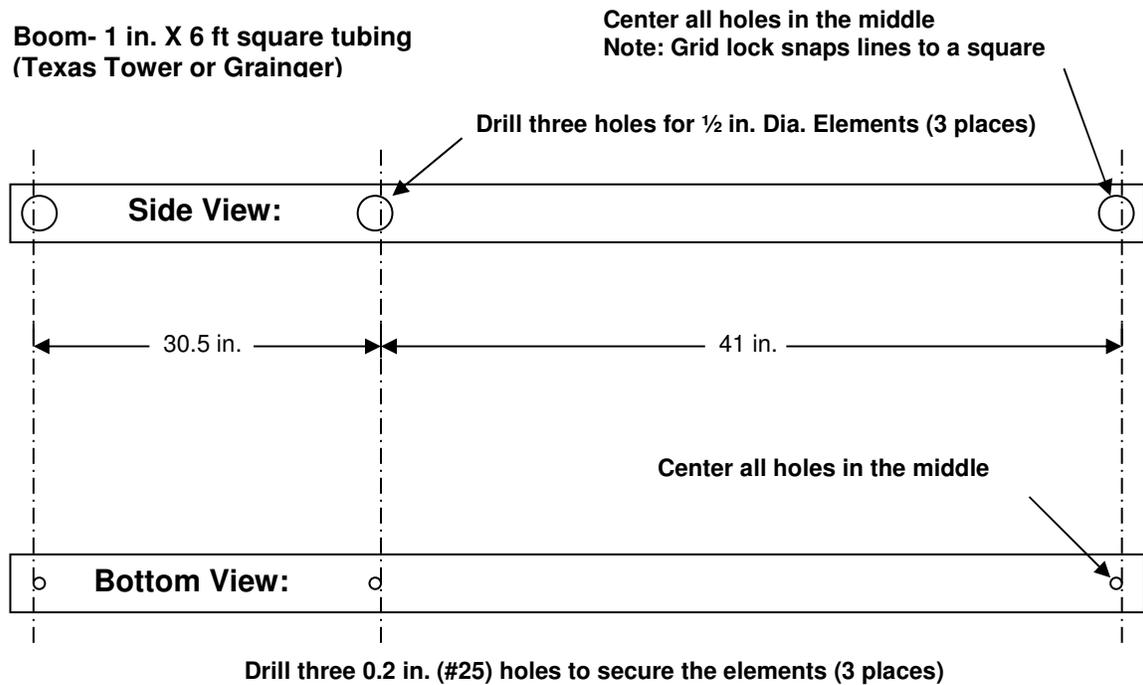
Dimensions for the mounting holes required for 1 in. X 6 ft square boom preparation.
